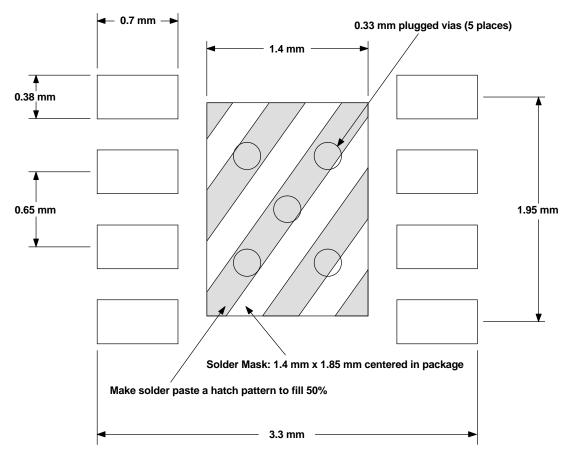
TPA6211A1 8-Pin QFN (DRB) Board Layout (Top View)
